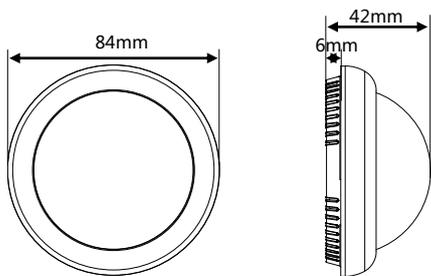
Dimensions - Front View Figure 3. Dimensions - Side View
